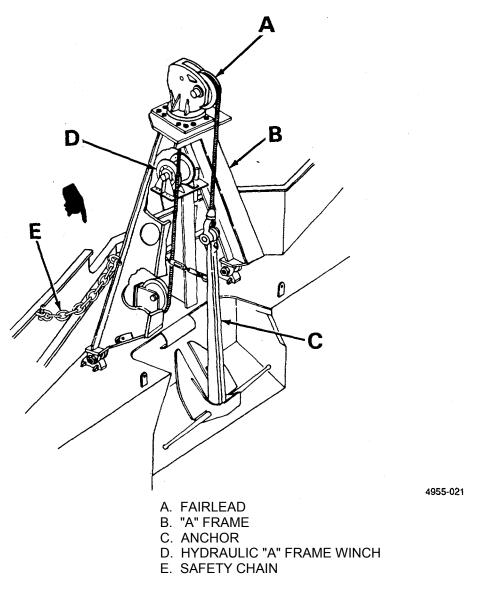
Anchor "A" Frame (Stowed Position) (Sheet 1 of 3)
